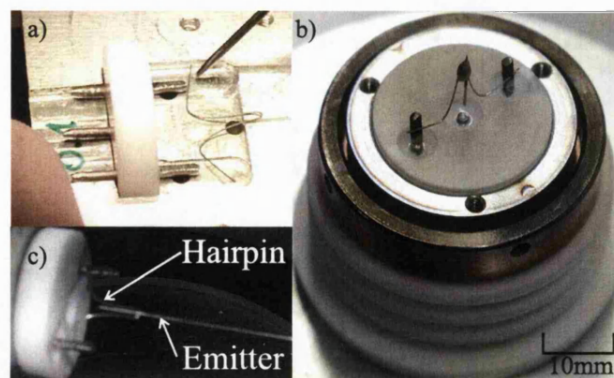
a) The forming of the Tungsten heating hairpin. The hairpin is mounted in a Al jig so welding is possible. The Al plate is the lower section of the jig, it has three holes through which the welding takes place. b) The hairpin with the uncut emitter tip welded in place. c) The finished source after wetting and testing.
